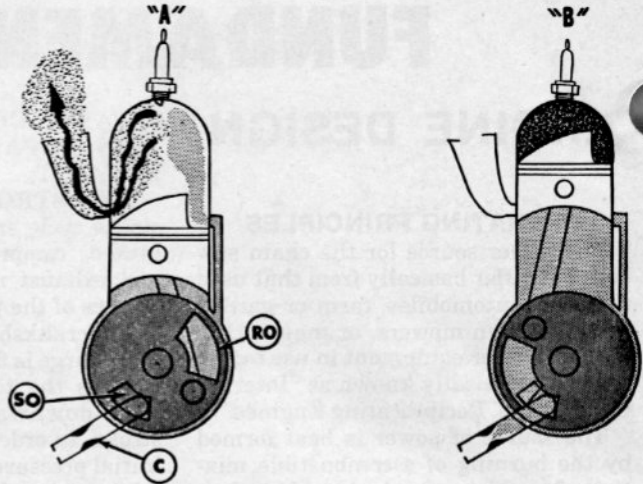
Two stroke, rotary valve engine. The incoming fuel charge is controlled by a rotary valve attached to the crankshaft. The opening in valve (RO) and crankcase (SO) align at the proper time to admit a fresh charge, then close to allow initial crankcase compression.
